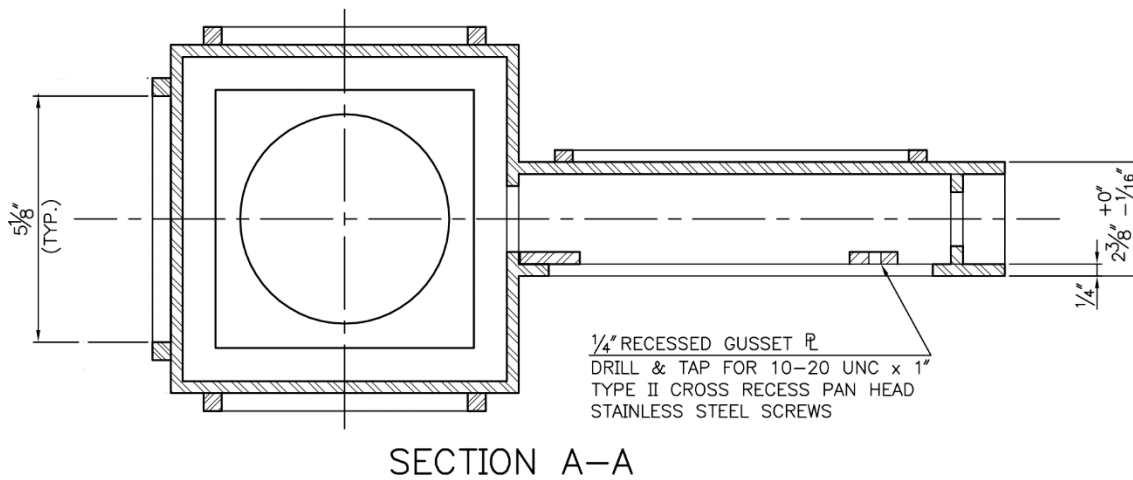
Bracket Arm Openings, Dimensions, Nominal
